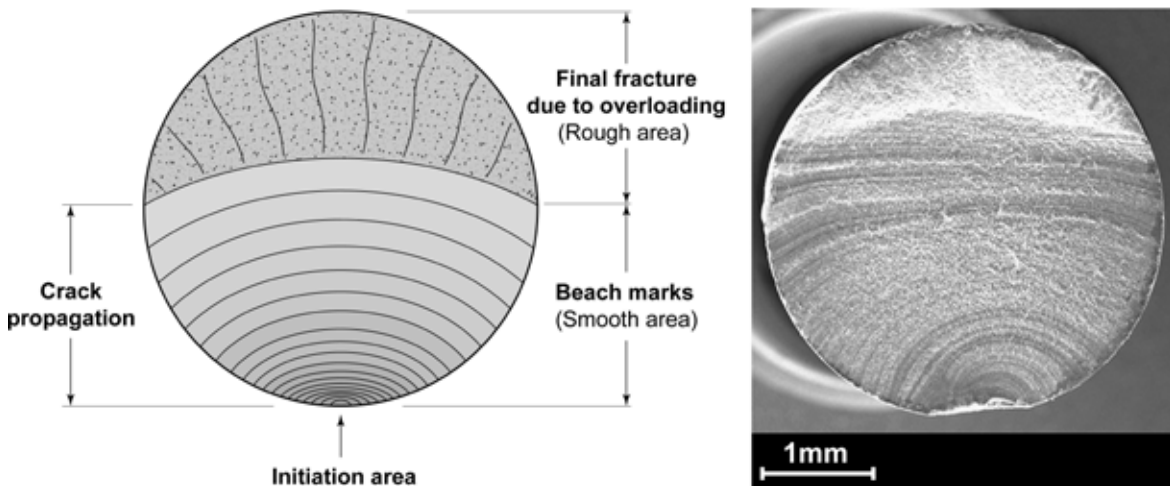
Schematic representation of the three stages of development of fatigue failure and example of a typical fracture surface (aluminium wire in a high voltage lead) [Laboratories of the Department of Mechanical Engineering of Politecnico di Milano - Milan, Italy].
